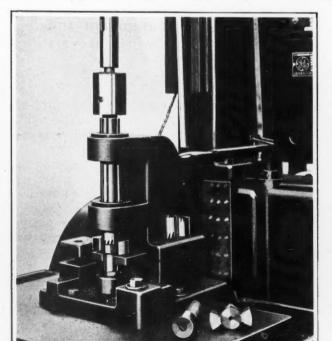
A Single-spindle Drilling Machine along the Wing-shaft Line which Performs a Facing Operation
